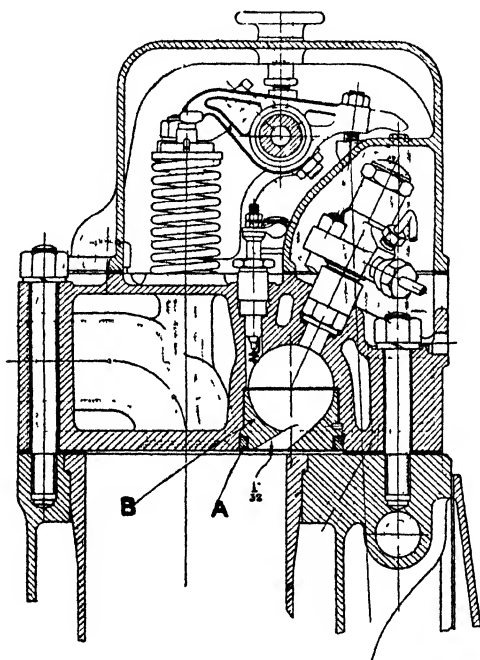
The Crossley Cylinder Head, showing "Comet" Combustion Chamber.
